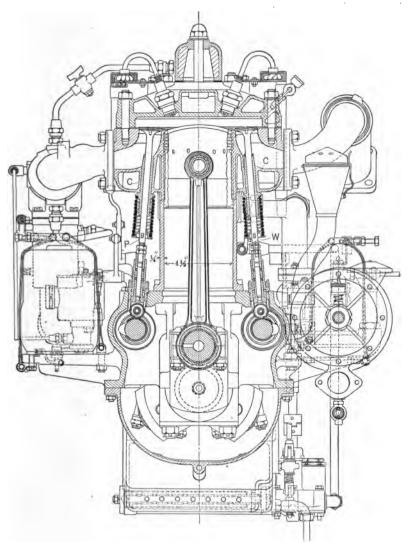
Pierce Arrow six-cylinder, 24-valve engine. $4\frac{1}{2}$ " $\times 5\frac{1}{2}$ ".
